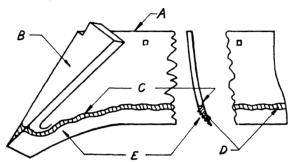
A plow share built up and then hard surfaced: A. the plow share, B. landside, C. old wear line, D. rebuilt by welding, E. hard surfaced
